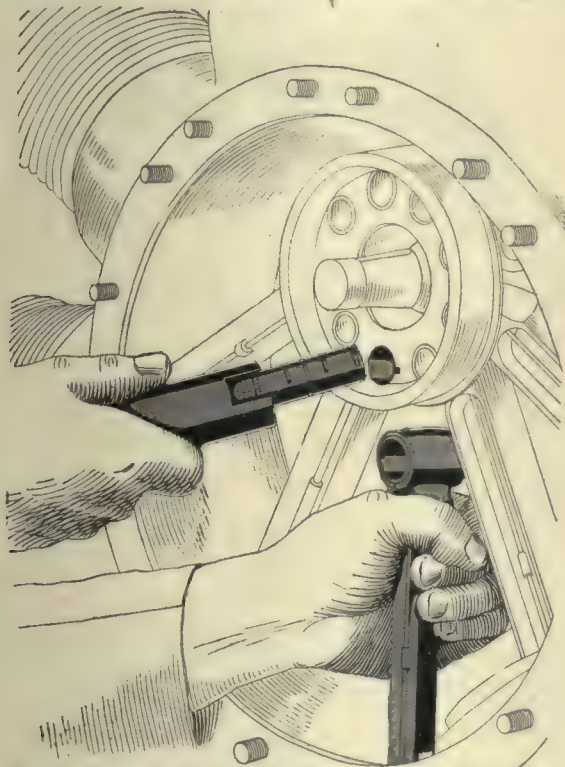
WRISTPIN WITHDRAWN AND PISTON LOWERED
